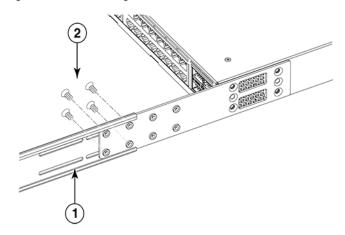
Attaching the rear brackets to the extensions at the front of the device
